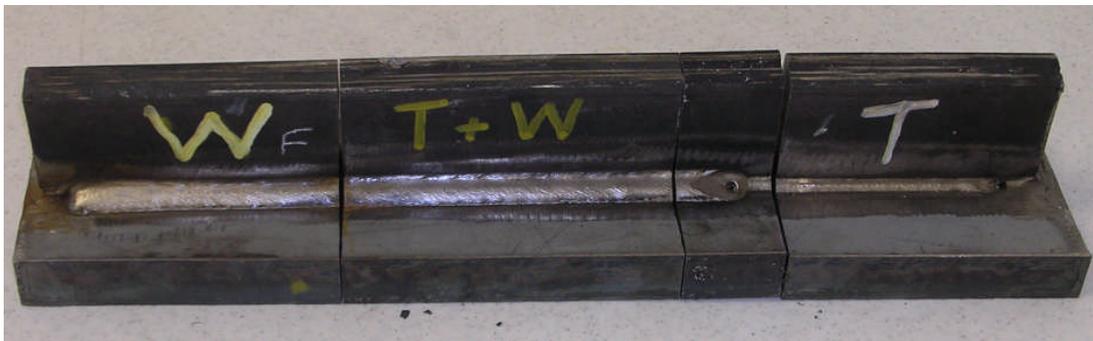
Illustration of the tee section coupon showing test welds.
